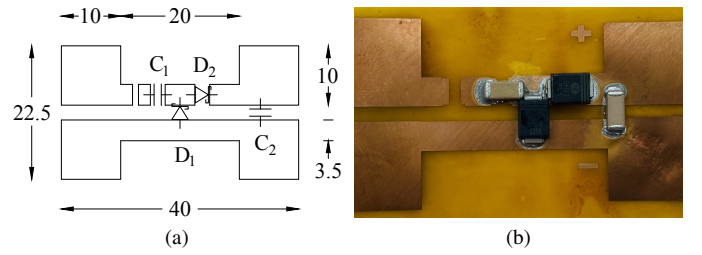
Voltage doubler rectifier circuit: (a) geometry, and (b) fabricated prototype. (Dimensions are in mm)
